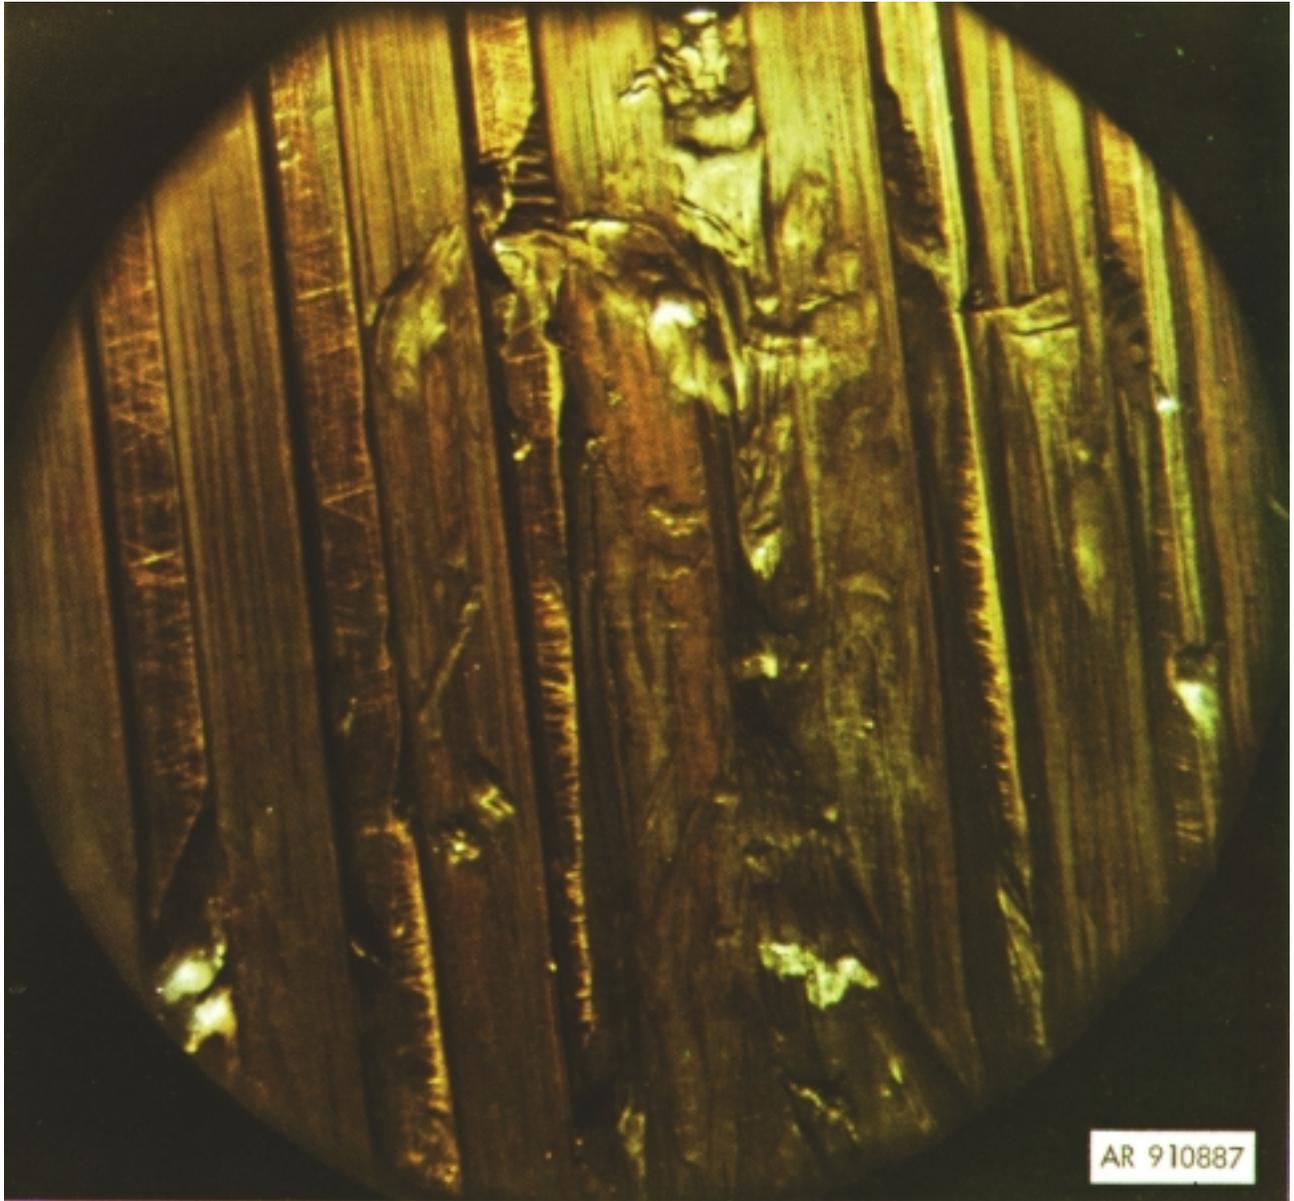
One severely and five lightly damaged lands: ACCEPTABLE.
